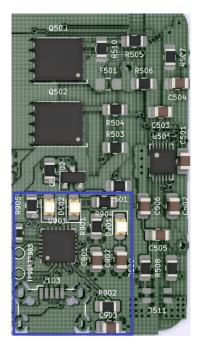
PCB design of the battery protection and USB to serial design in the blue box.
